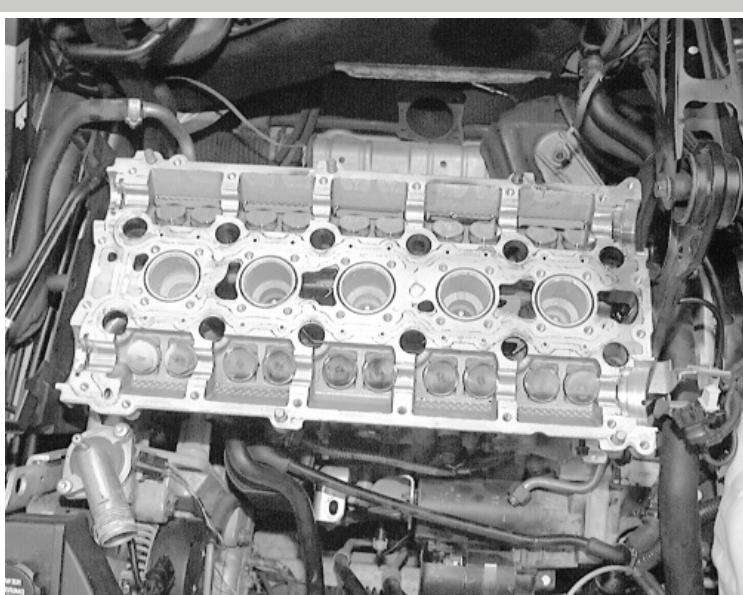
Carefully place the cylinder head onto the engine block
